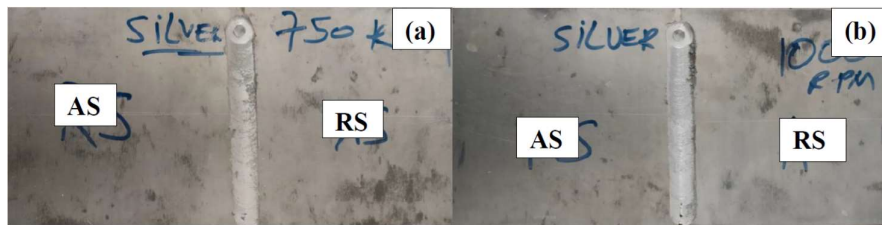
AA7075-T6 plates friction stir welded at different spindle speeds: (a) 750 rpm, (b) 1000 rpm. AS refers to advanced side and RS refers to retreat side.
